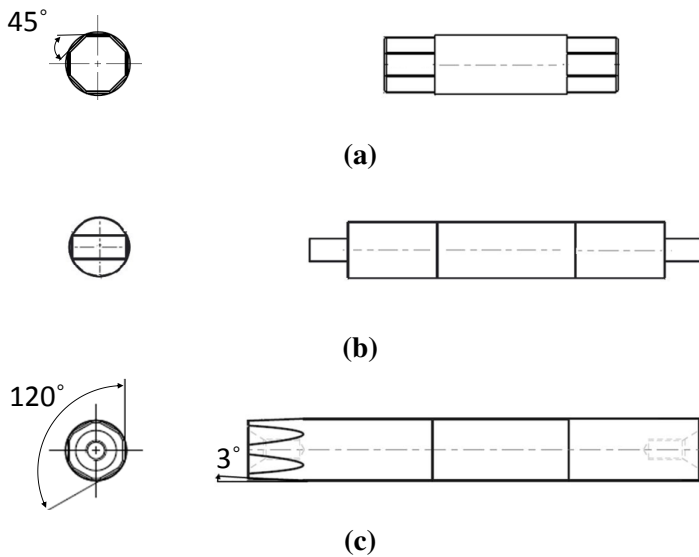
Drawing of (a) lower tool pin, (b) upper tool pin at Station A and (c) upper tool pin at Station B.
